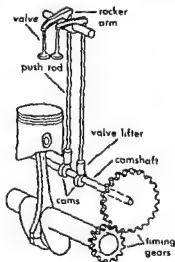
Isometric of moving parts of valve mechanism (Buck Motor Division of General Motors Corp)
